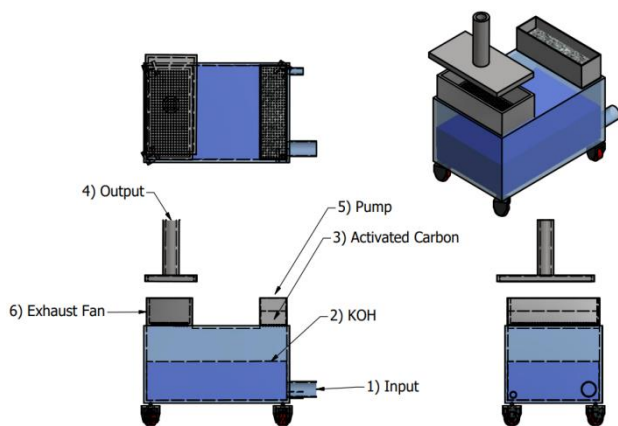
Design of welding smoke filtration equipment. 1) Welding fume inlet, 2) KOH solution, 3) activated carbon, 4) filtration fume outlet, 5) pump, 6) exhaust fan.
